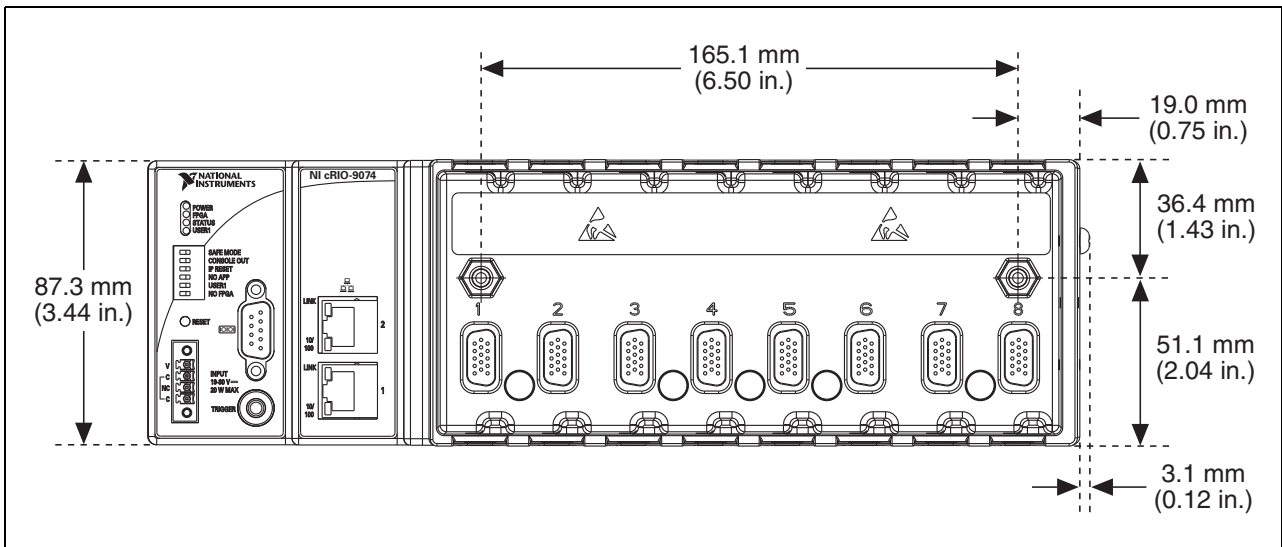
cRIO-9072/3/4, Front View with Dimensions
